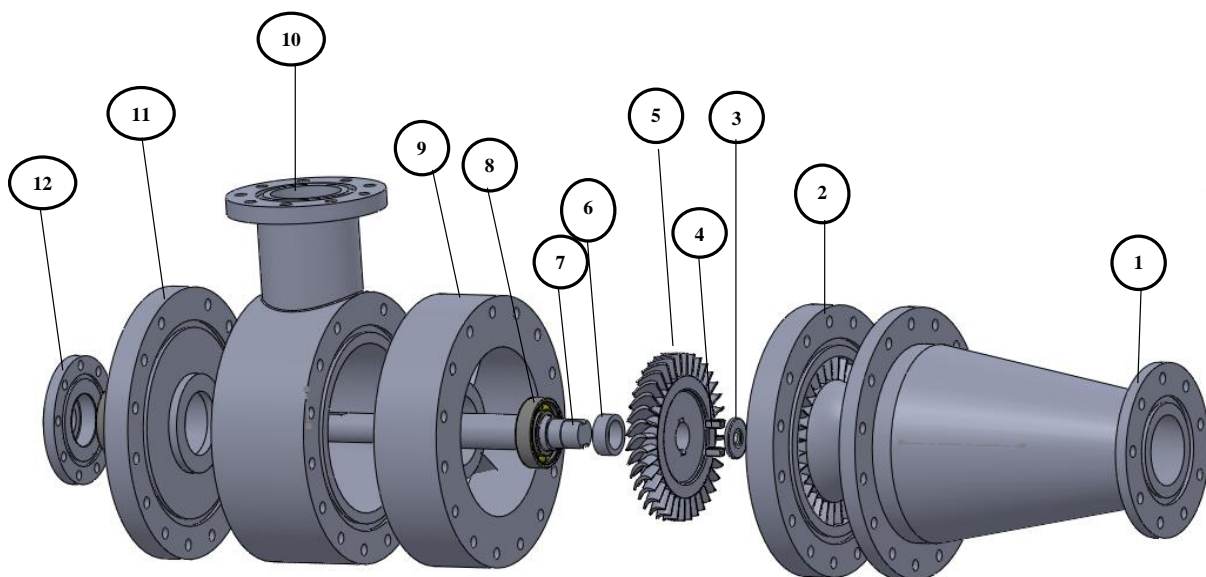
Assembly exploded schematic: 1- Reducer 2- Stator 3-Disc 4- shaft key 5- Rotor 6- Spacer 7- Shaft 8- Bearings 9- Rotor case 10- Outlet ring 11- closing end 12- shaft sealing house.
